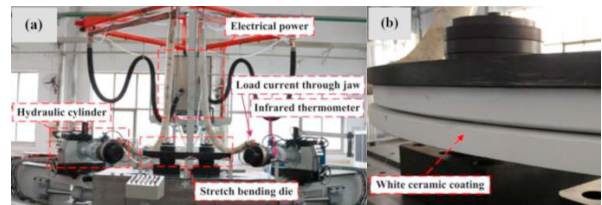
Electrically assisted stretch bending of profile [31]: (a) set-up; (b) workpiece and die.
